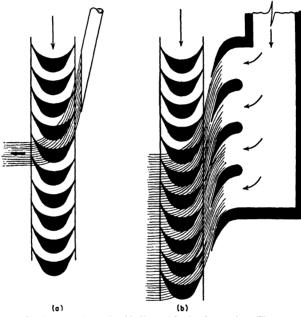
(a) Single row of impulse blading with simple nozzle. The steam jet moves faster than the blading, causing the jet to compress itself and exert a force on the blading. The jet follows a curved path as it passes between blading and loses a large part of its speed. (b) A given row of blades can be made to do more work by passing greater steam flows through it. The multiple nozzle at the right passes more steam and can be made to cover the entire wheel periphery.
